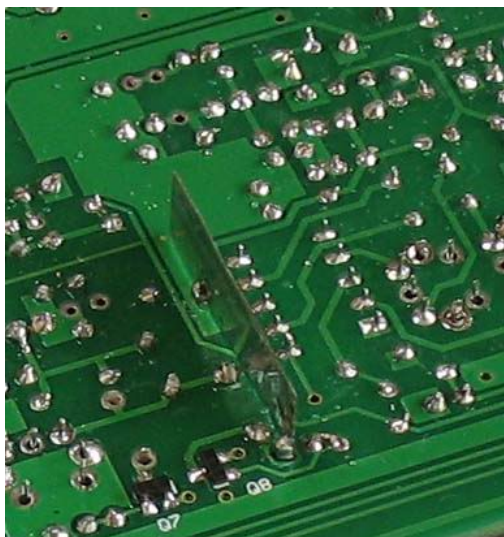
Even underside shield (6×25 mm) could be placed, with the end soldered on GND pad of C37. Leave a clearance of 0.5 mm, to prevent it from short-circuiting the track.
